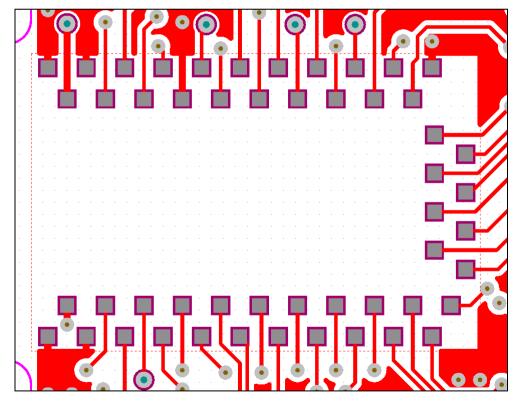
Exemplary base board footprint for 22M00 / 23M00 (top view)
